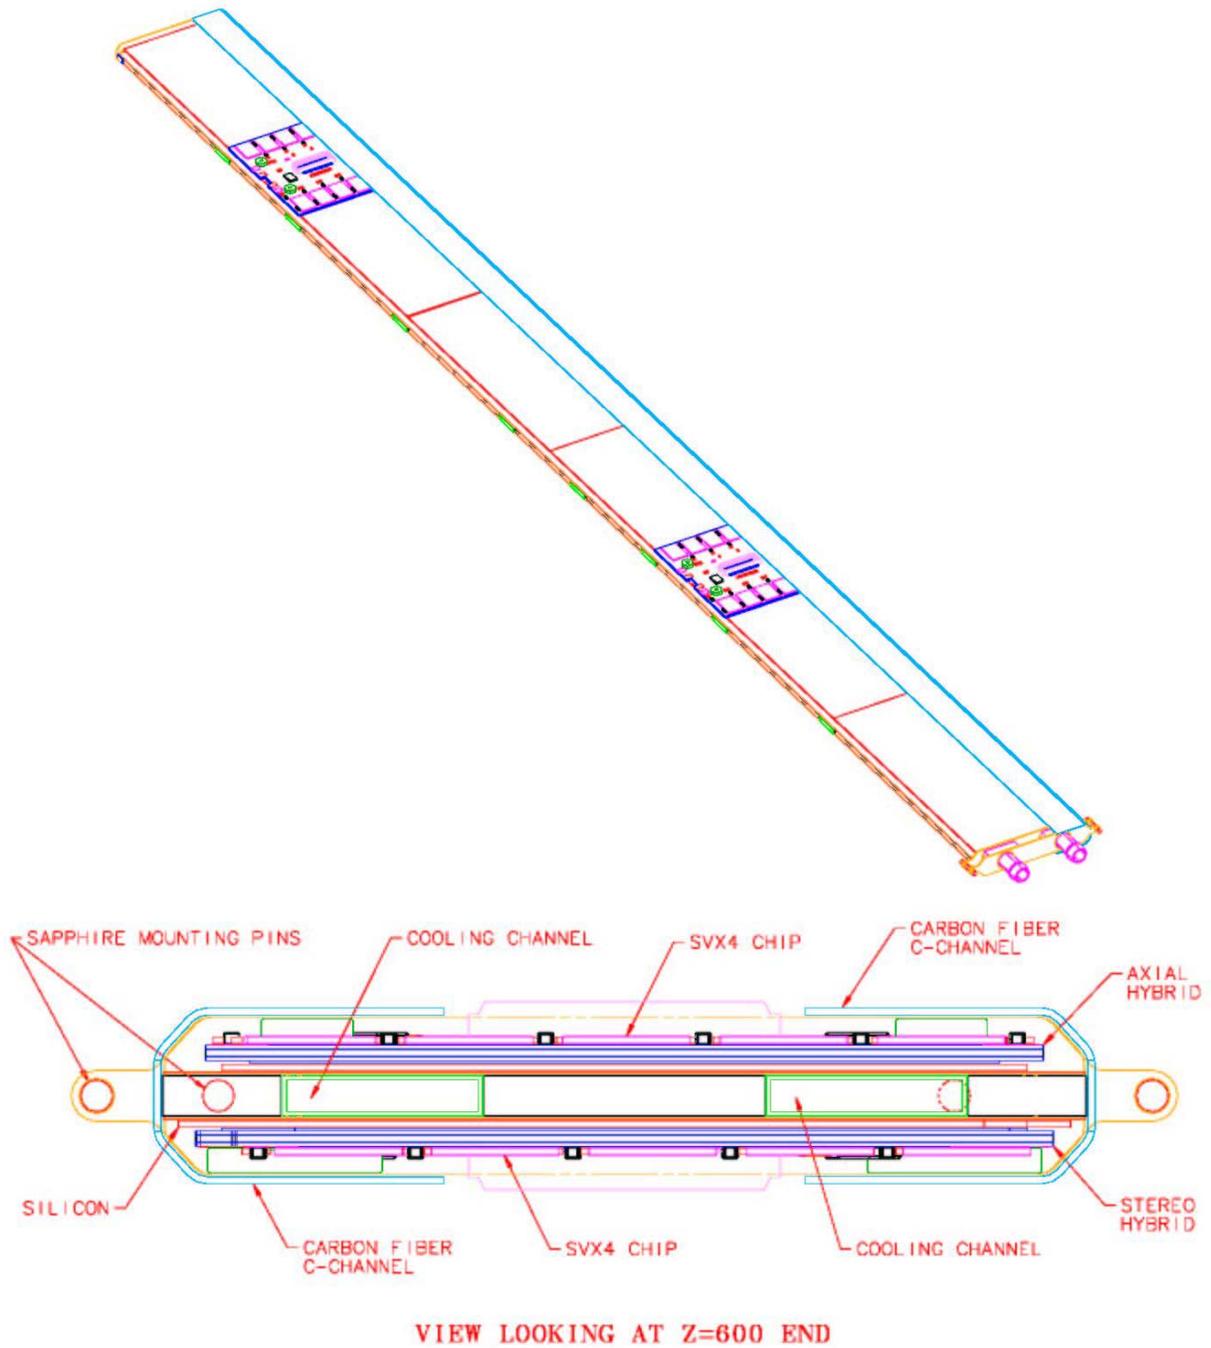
Stave assembly drawings. The upper drawing shows a isometric view of the stave with one of the C-channels removed. The lower plot is an end view of a complete stave assembly.
